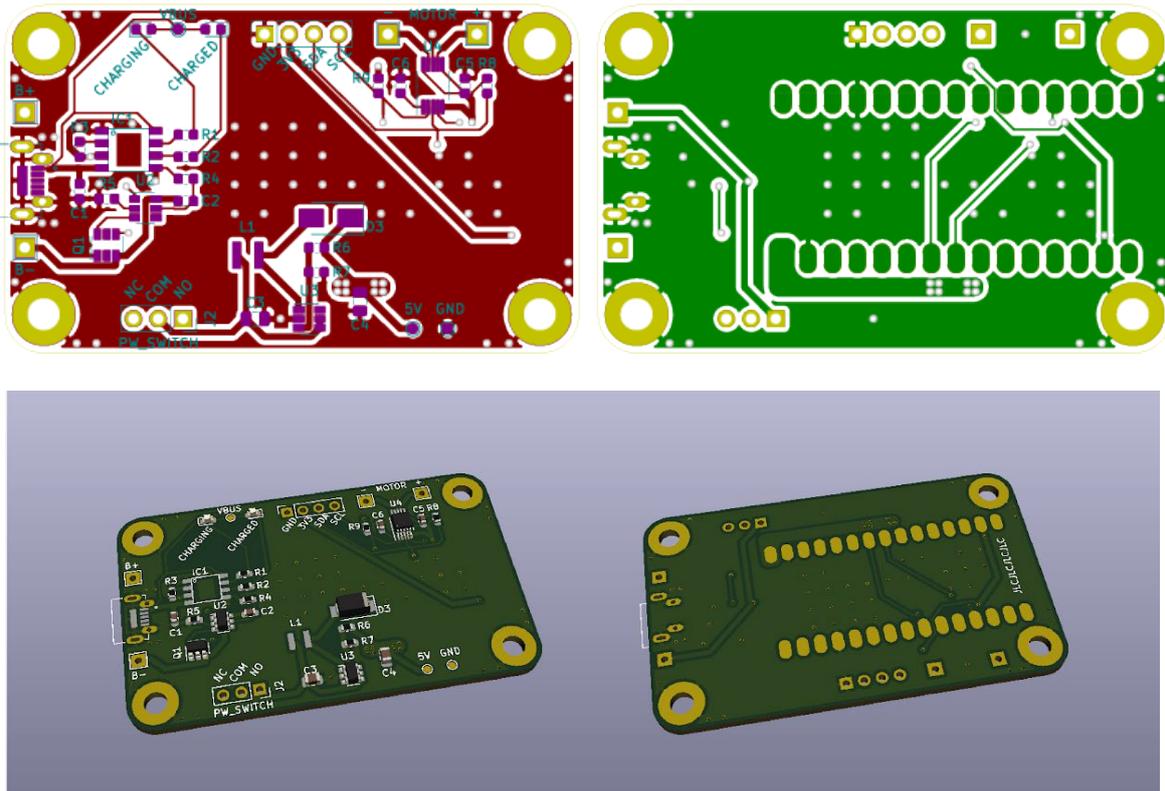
Error! Reference source not found. A (top) depicts the printed circuit board layout of the wearable system. The top layer is shown on the left, and the bottom layer is shown on the right. B (bottom) depicts a render of the board layout, showing the board populated with components. The board measures 59mm in width and 36mm in height.
